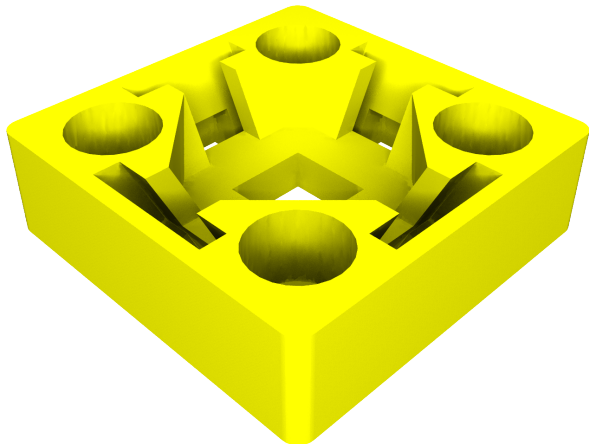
LED holder ray tracing viewed from the front (specimen-imaging) side. The printed circuit board assemblies, with LEDs soldered in place, slide into the slots with the surface shown and mate with the front cap (Fig. 2).
